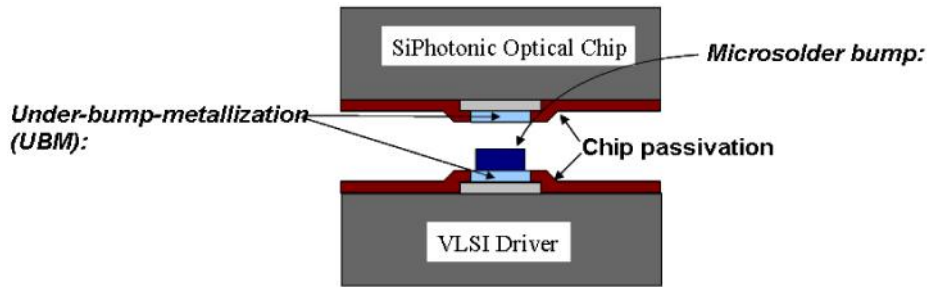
Illustration of flip-chip hybrid-bonding technique using microsolder bumps.
